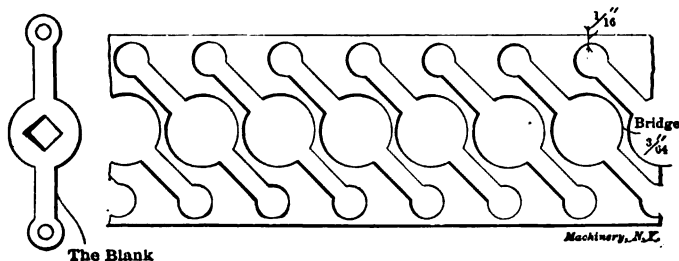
Section of Stock after having been run through Die in Fig. 16
